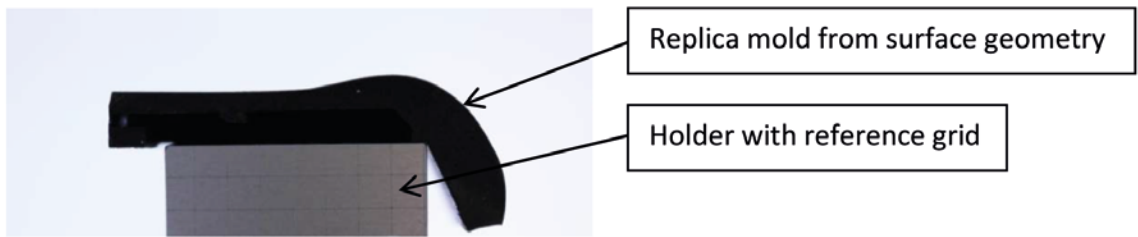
Picture for profile measurement on replica mold from core shroud support bottom weld.
